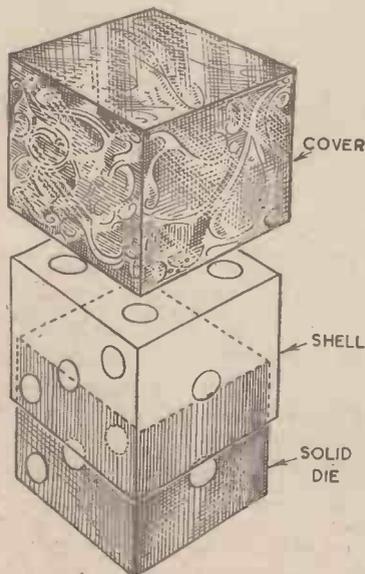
A solid cube fitted with a shell which exactly resembles it.
